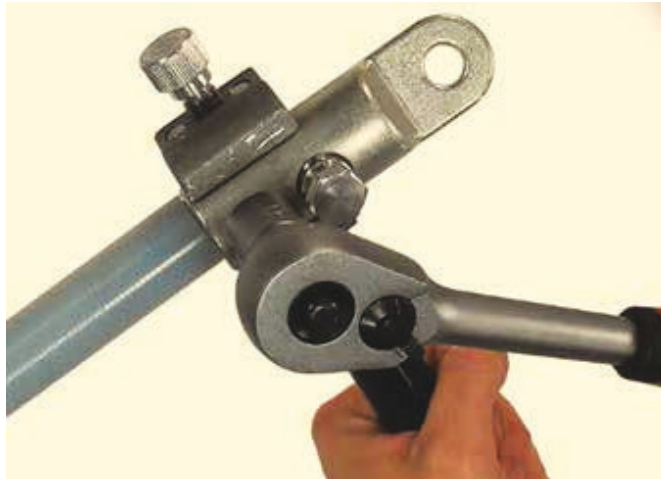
Use of a support tool for installation of a shear-head mechanical lug
